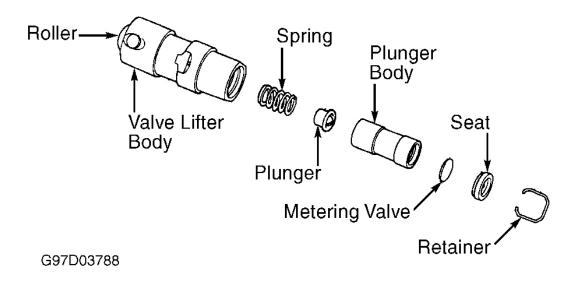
Exploded View Of Valve Lifter Courtesy of FORD MOTOR CO.
